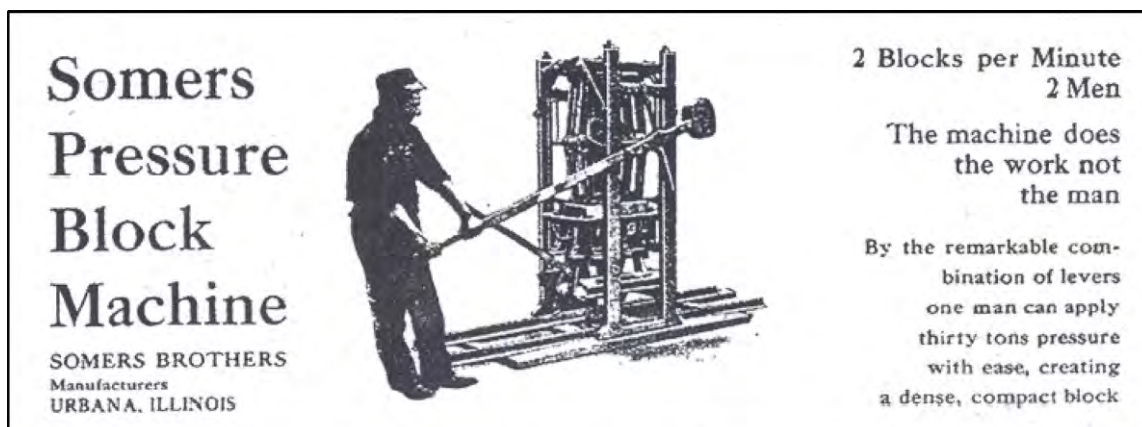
Concrete block as a new building material: Somers Pressure Block Machine used to compress blocks
